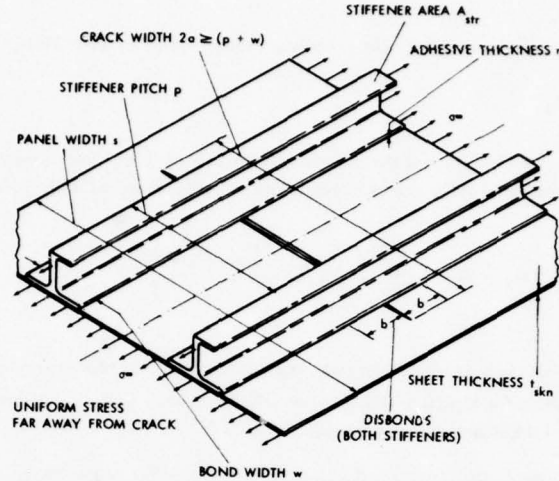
ONE-BAY SHEET CRACK RESTRAINED BY BONDED STIFFENERS
